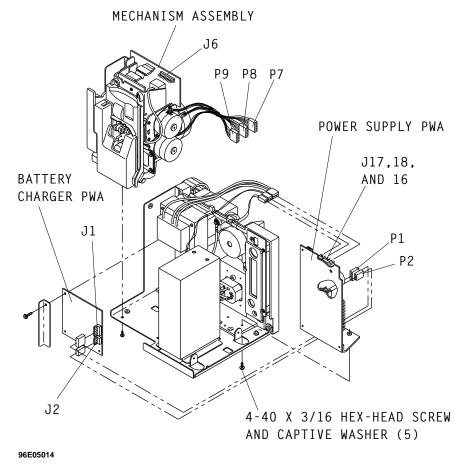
Mechanism Assembly, Power Supply PWA, and Battery Charger PWA Replacement
